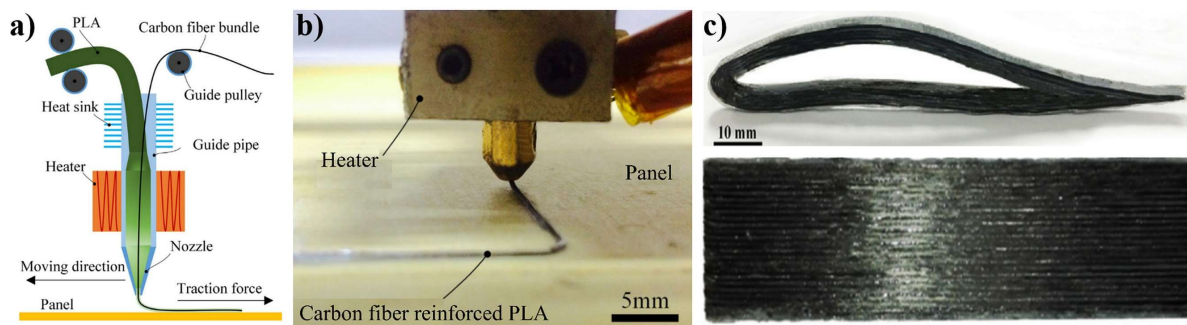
a) Extruder schematics [102], b) Composite deposition [102], c) Printed parts [102]
